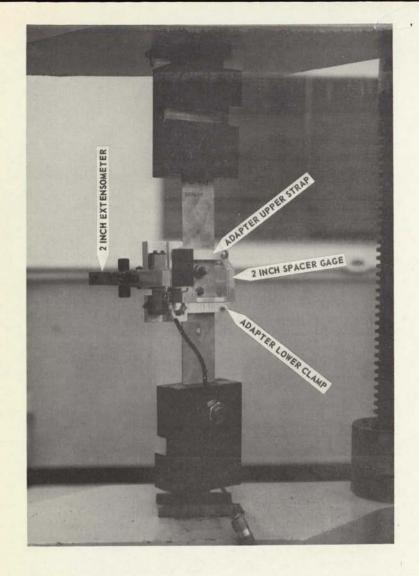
ARRANGEMENT OF JOINT PULLING FIXTURE, LAP JOINT SPECIMEN AND EXTENSOMETER FOR DETERMINING THE JOINT STRENGTH OF 4.826mm (0.190 in.) FASTENERS
